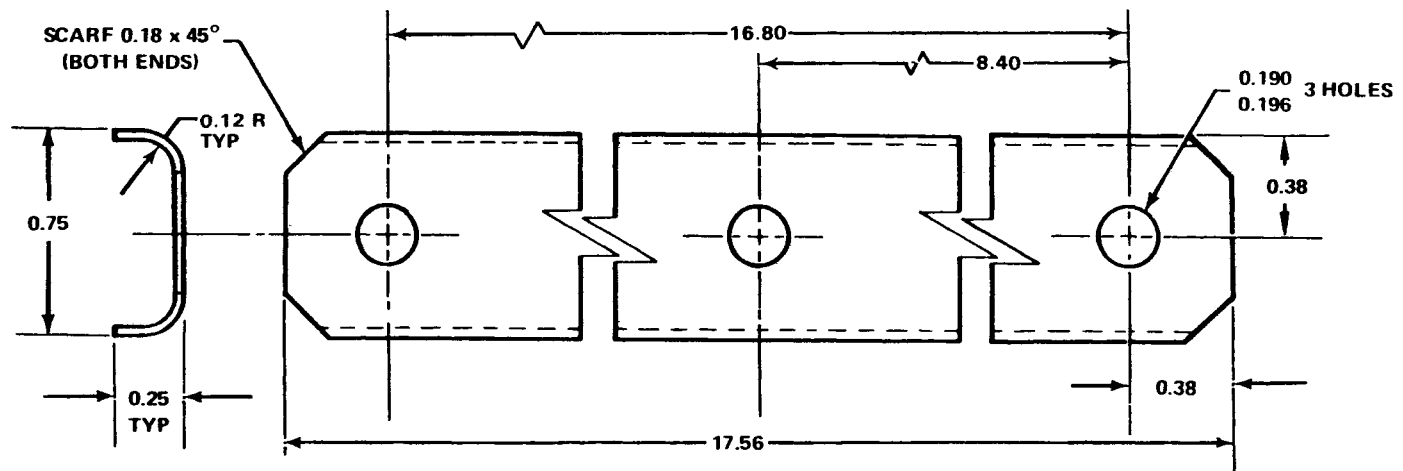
Part Number 205-030-029-5, DOOR ASSEMBLY
